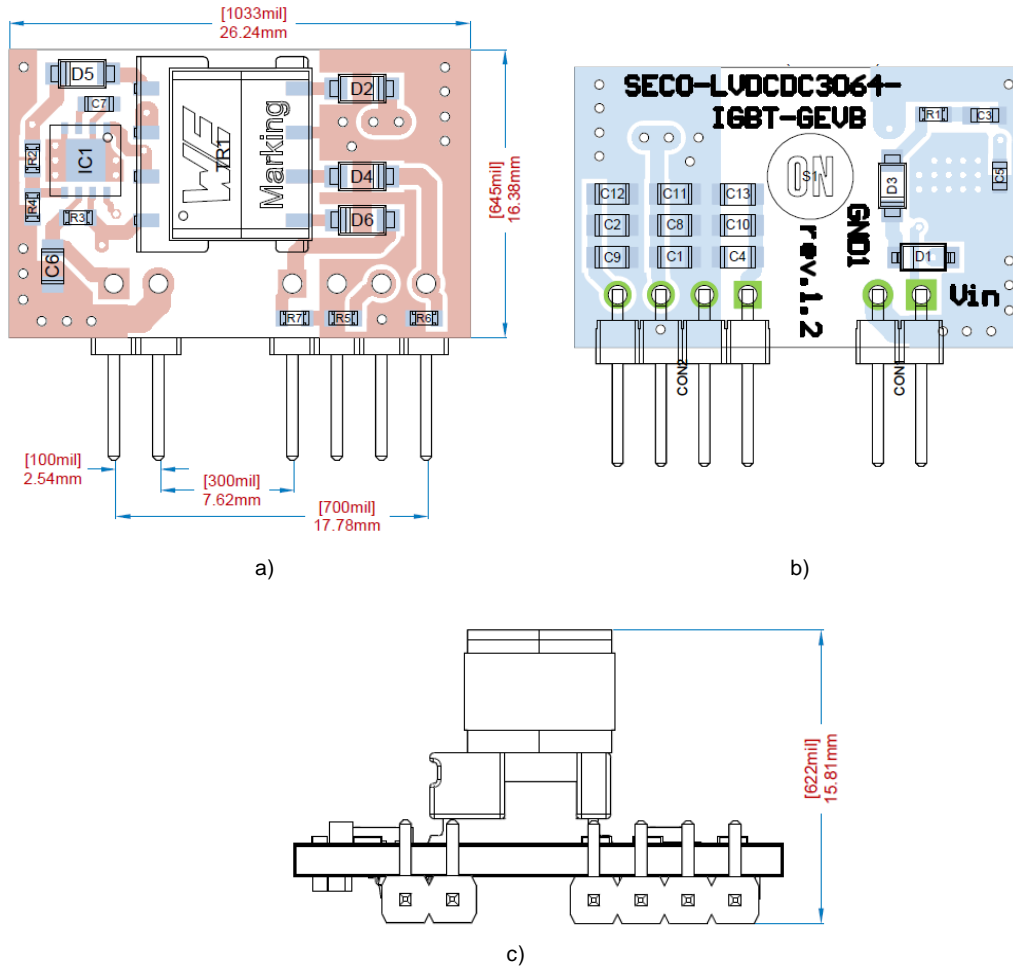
Board Layout: a) Top Side with Dimensions b) Bottom Side c) Front Side. Header is Pin Compatible with Standard DC/DC Isolated Supply Bricks.
